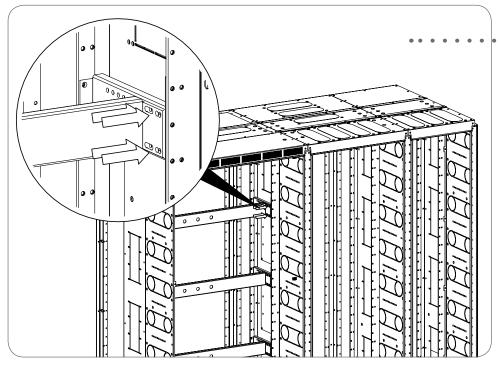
Fix Holder for vertical busbars into Holder for support insulator holder.
